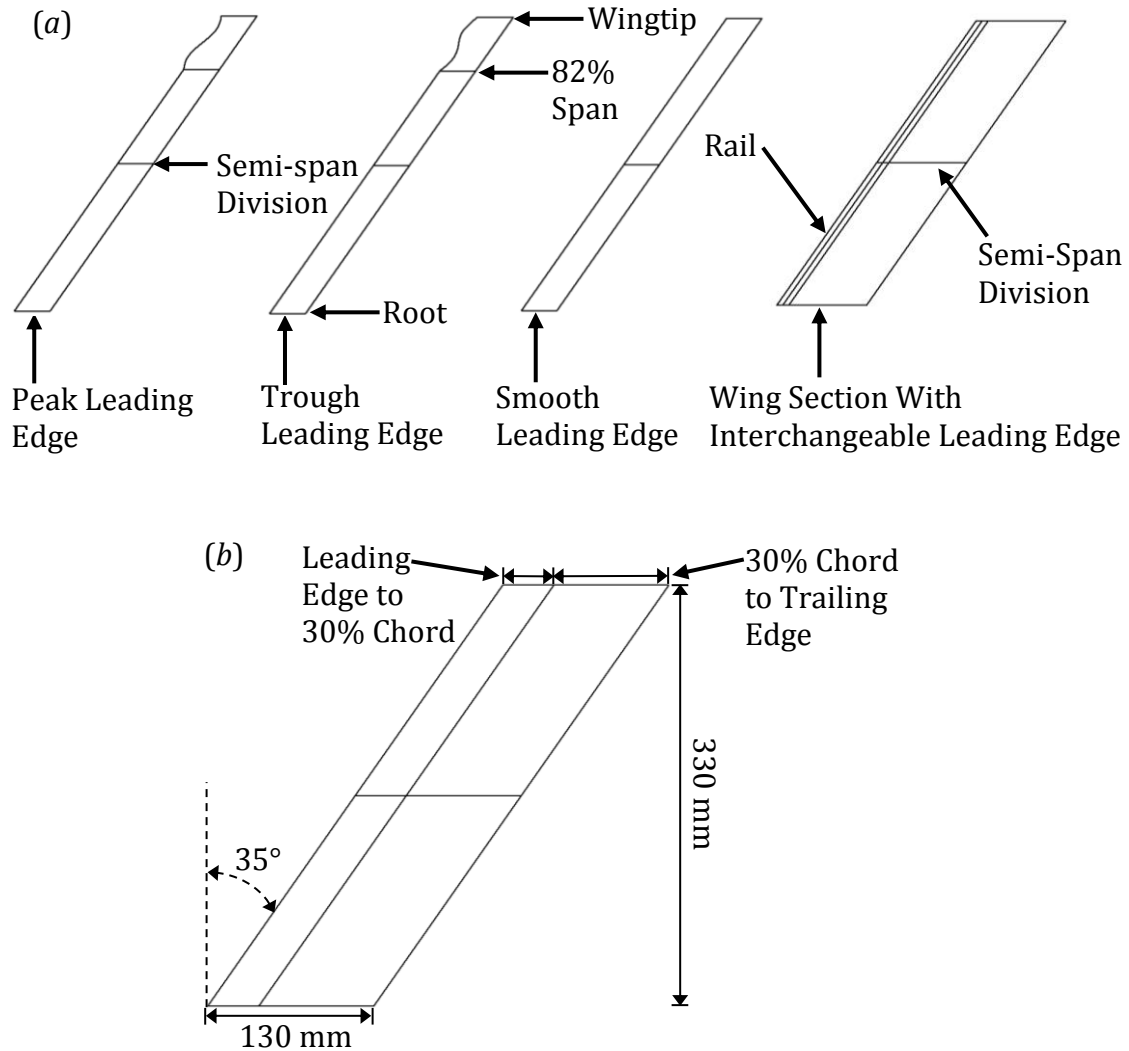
(a) Wing section and three leading edge sections modelled and manufactured, (b) assembled smooth wing configuration.
